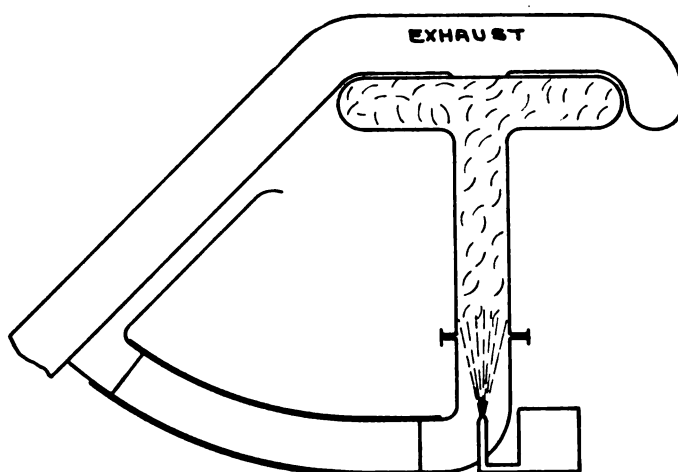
MANIFOLD CONSTRUCTION TO SUPPLY HEAT TO THE AIR CHARGE BEFORE IT ENTERS THE CARBURETER
